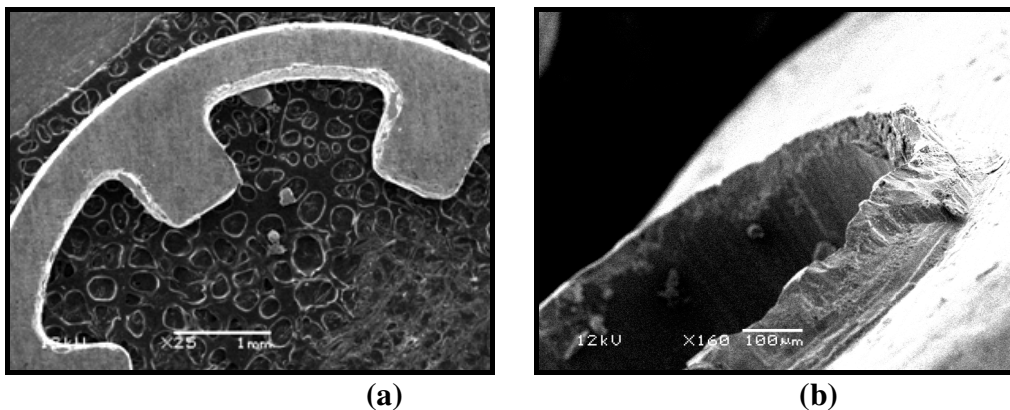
Microscopic photo of the cutting region of the rotor and stator using the die cutting process – (a) Stator – (b) Rotor.
